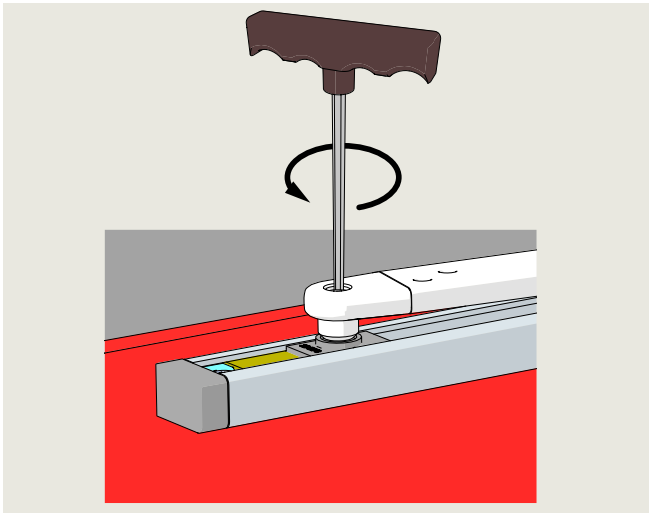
Fastening drive arm with CPD to pivot pin
